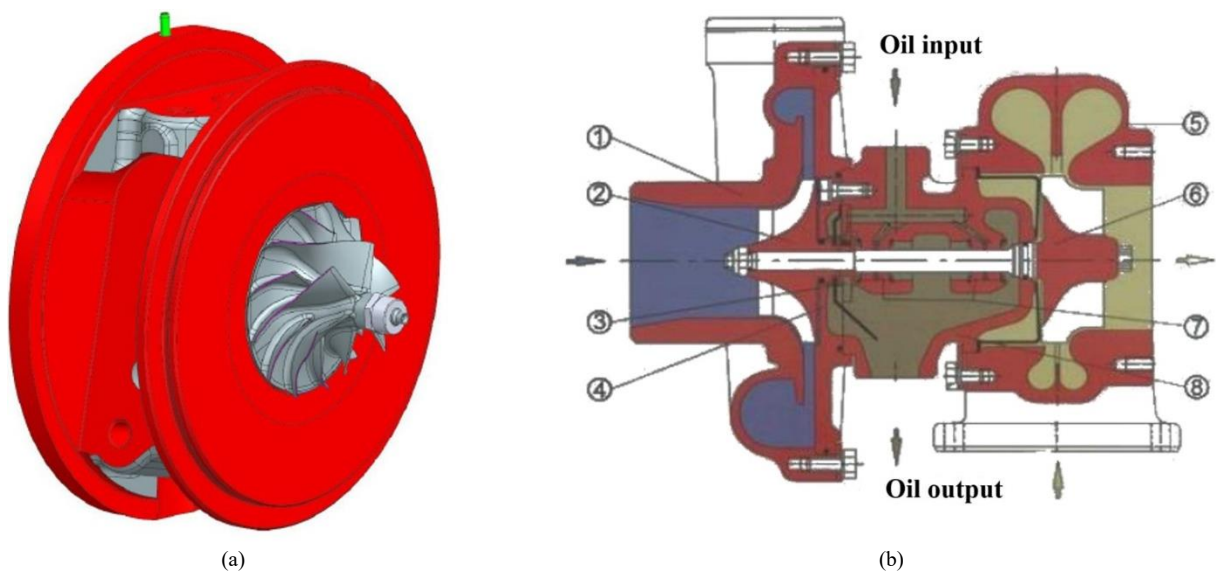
The center of the manipulated turbocharger with a view of the compressor impeller (a) and a section through the turbocharger (bt), where the individual positions are marked: 1 – compressor housing, 2 – compressor wheel, 3 – axial oil bearing, 4 – rear wall of the compressor housing, 5 – turbine housing, 6 – turbine wheel, 7 – radial oil bearings, 8 – bearing housing.
